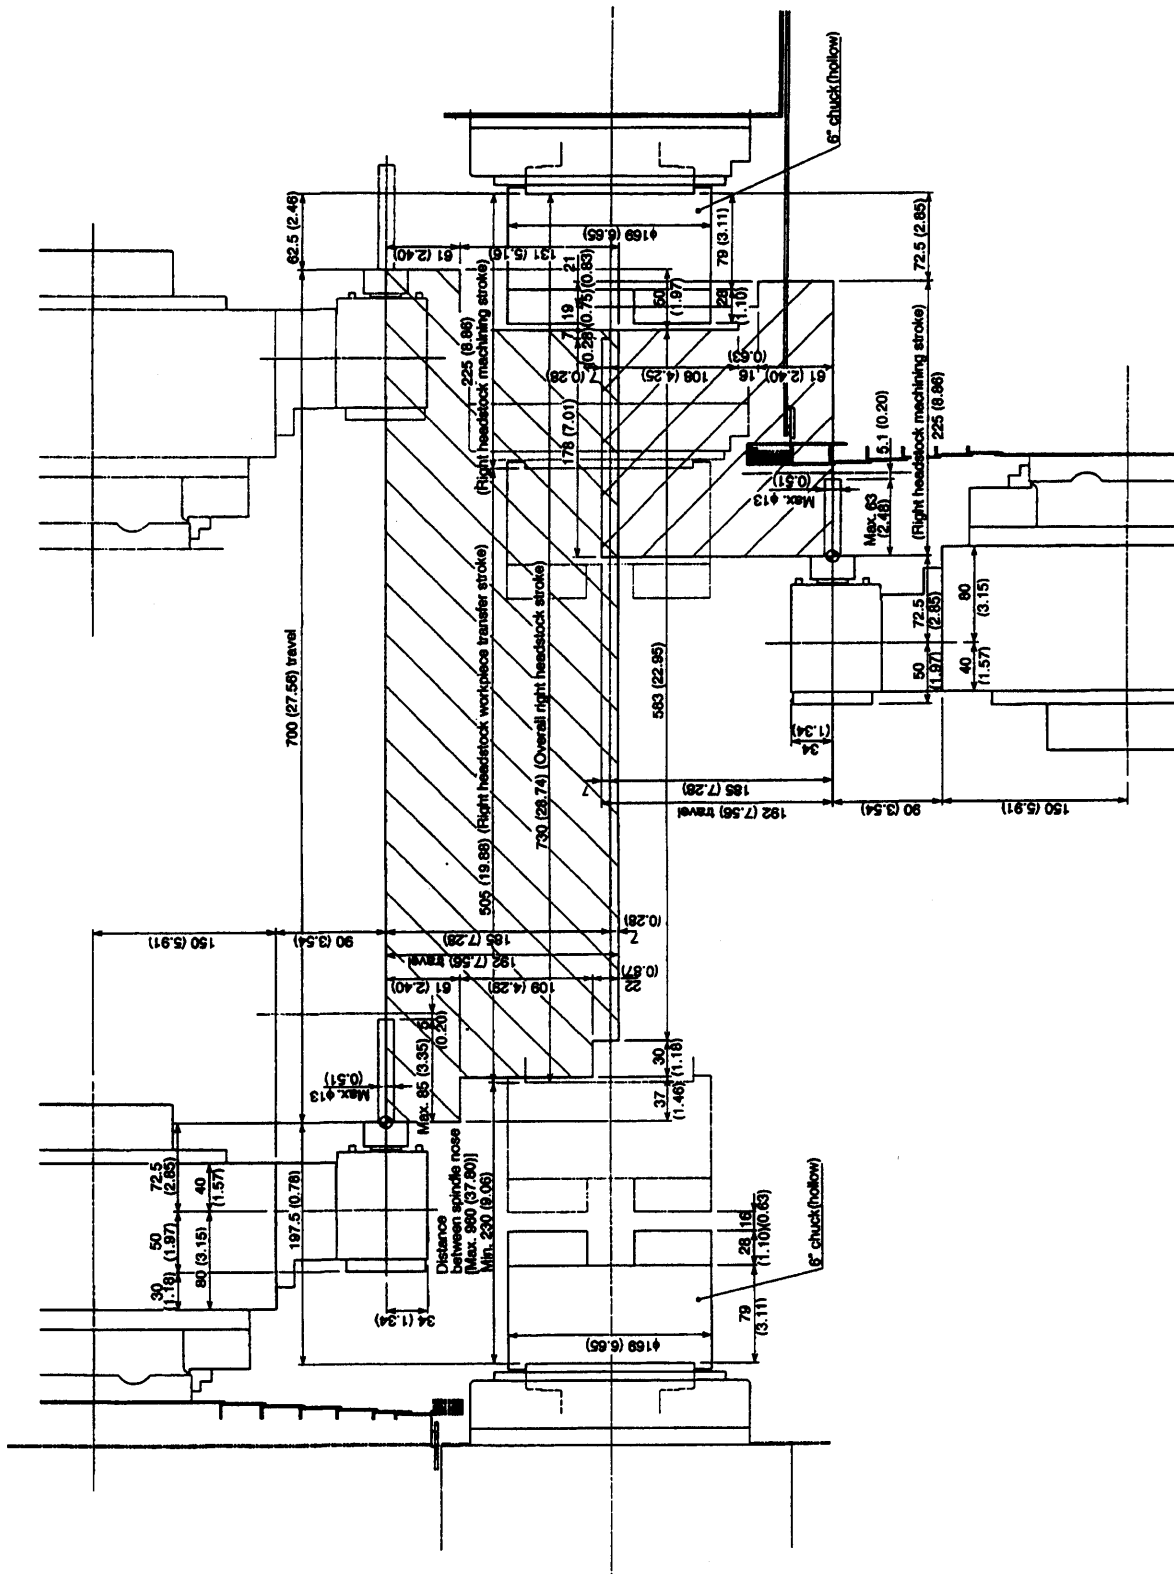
Face Drilling End Milling Toolholder Diagram (Main Spindle)
